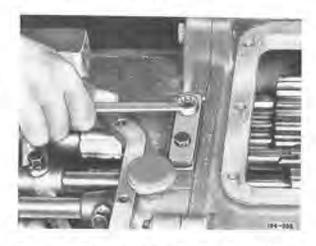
Removing Shifter Rail Poppet Ball Cover
